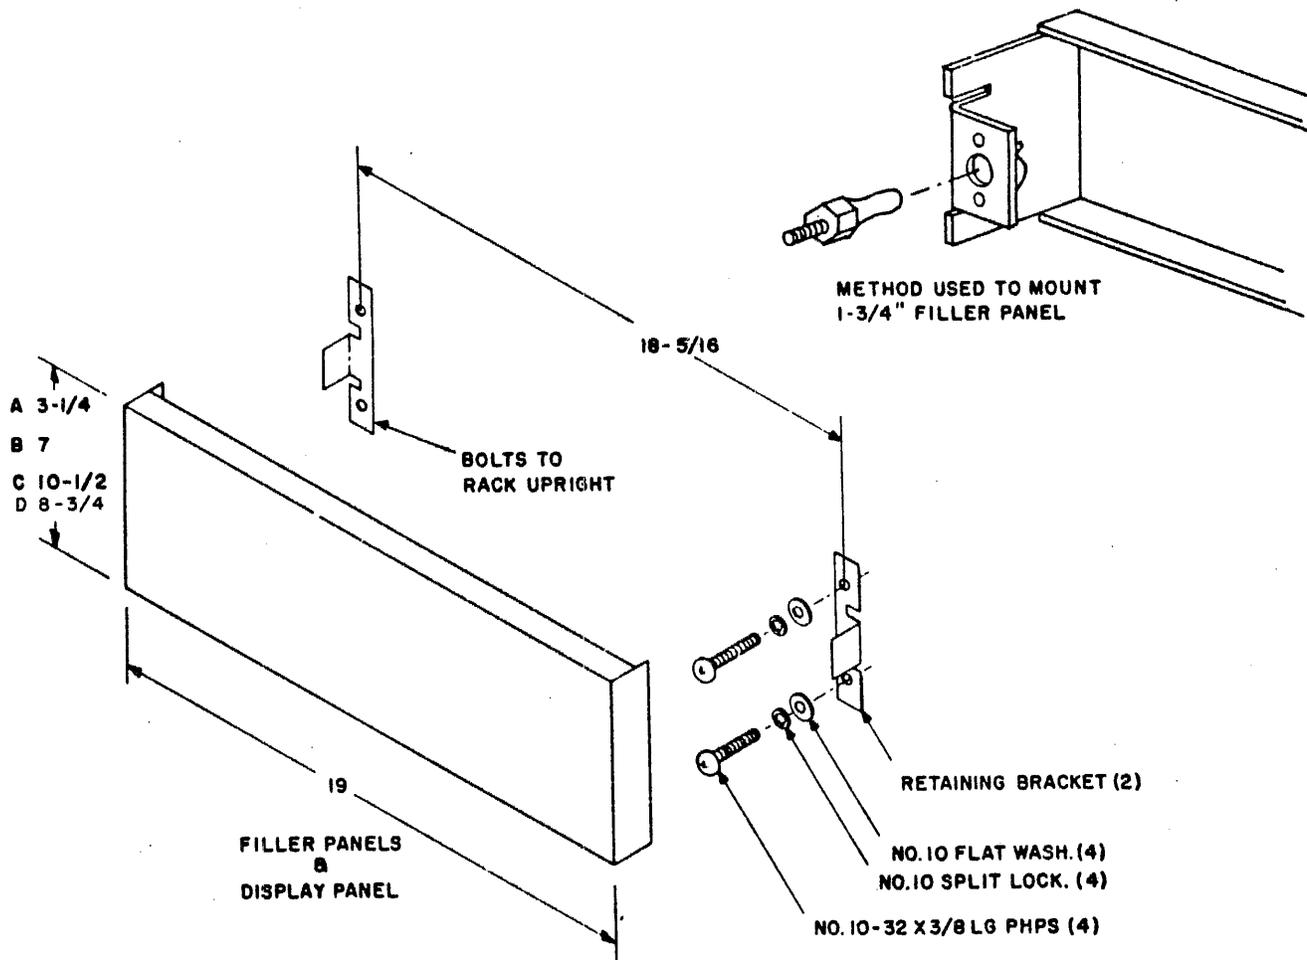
Typical Mounting Configuration for Display and Filler Panels
